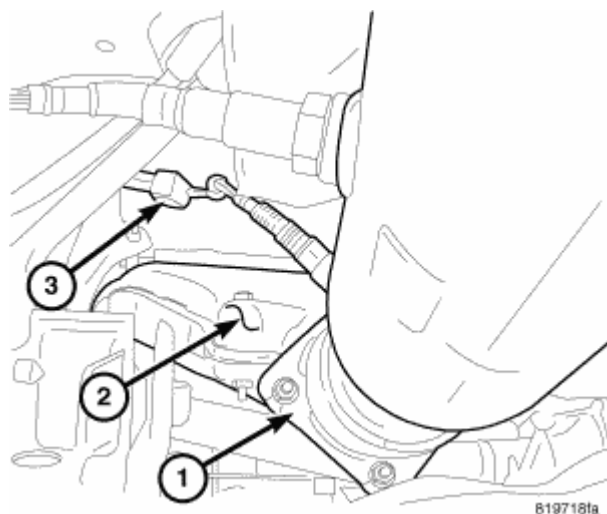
EXHAUST MANIFOLD HEAT SHIELD
